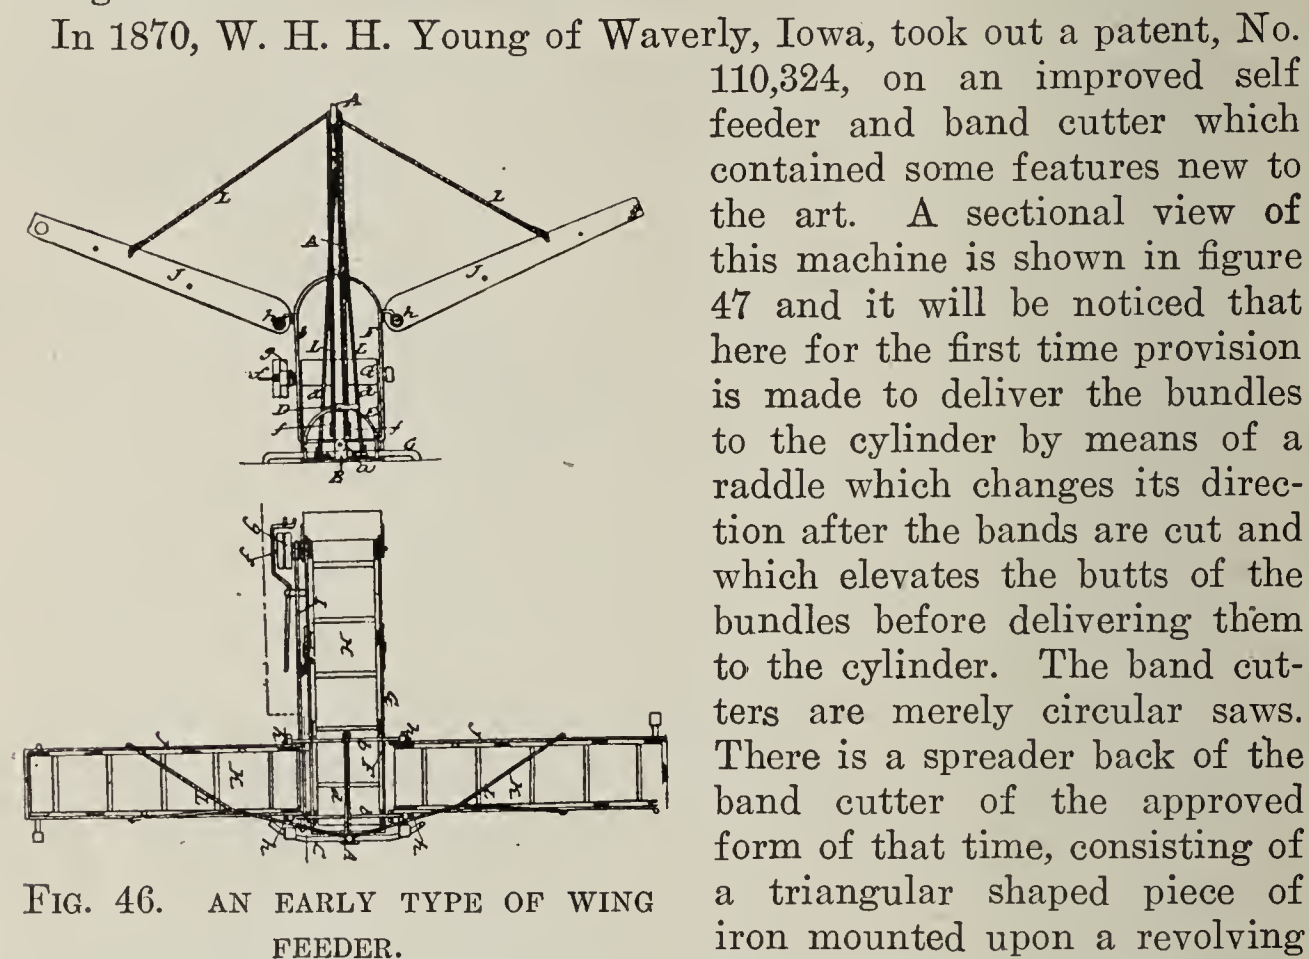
AN EARLY TYPE OF WING FEEDER.
